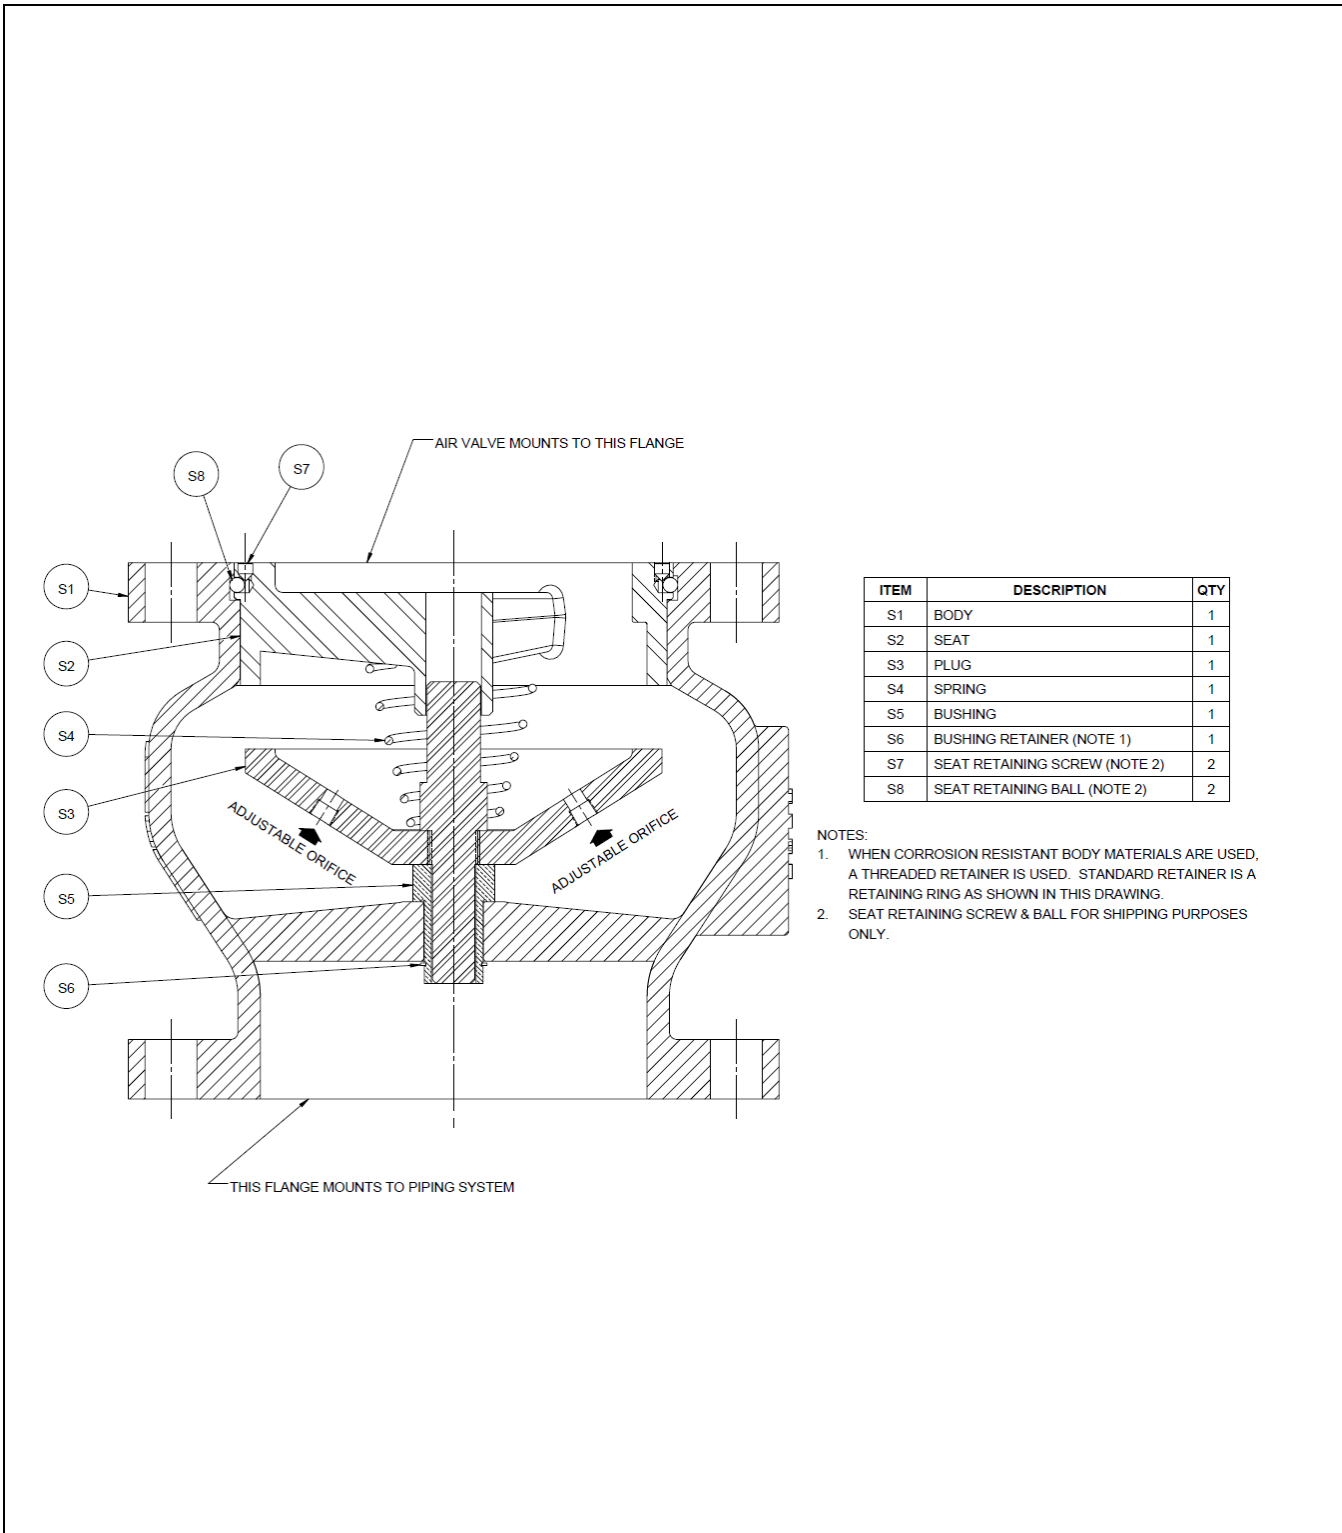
CSV 3-24" (80-600mm) Surge Check Valve
